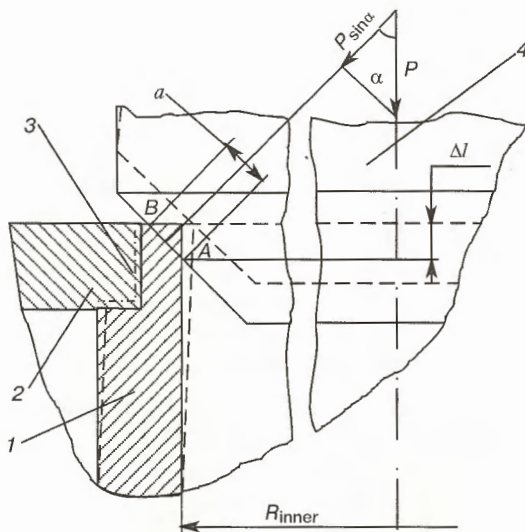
Joining of flange to pipe with a grooving: 1 — pipe; 2 — flange; 3 — mixture of a brazing alloy with a flux; 4 — welding punch. Here and in Figure 2 a dash line shows an initial arrangement of parts to be joined and a welding punch.
